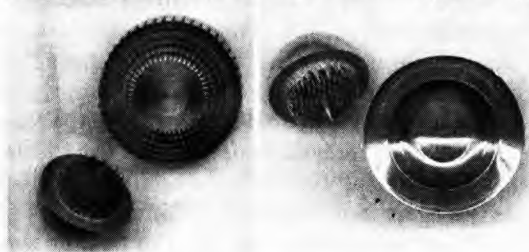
The pre-prototypes of THRA endoprosthesis manufactured by Controlled Electrical Discharge Machining (EDM)
